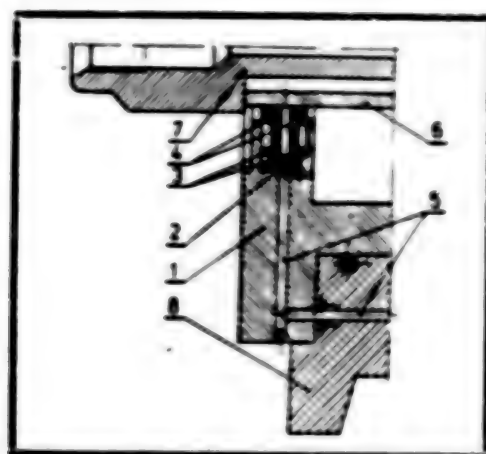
Sealing assembly of the drive shaft of NP34M-1T: 1 - cover; 2 - sleeve; 3 - shaped rubber rings; 4 - clamp springs; 5 - drainage channel; 6 - drive shaft; 7 - coupling; 8 - pump body.
